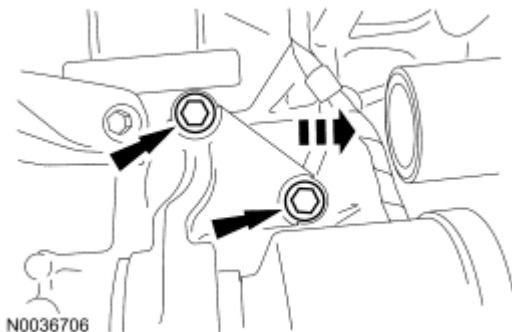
Locating Half Shaft Carrier Bracket Bolts And Sliding RH Halfshaft Out Of Transaxle
